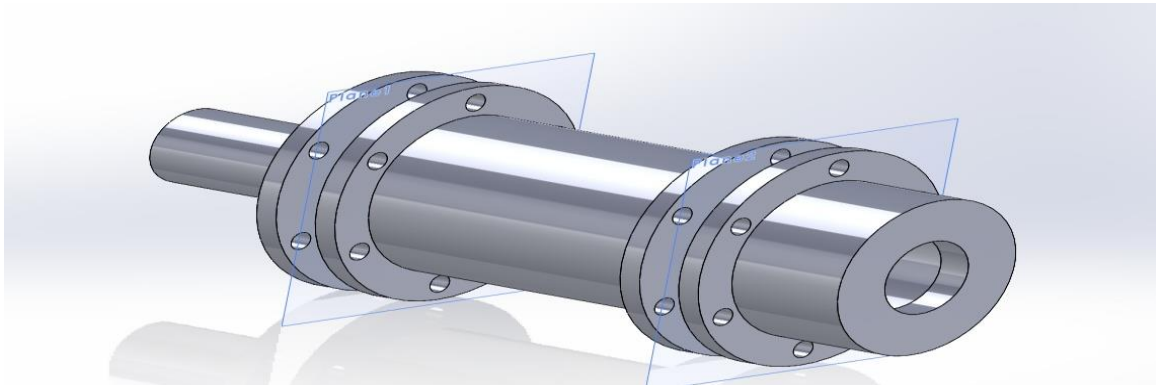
Isometric CAD model of the assembled hybrid rocket motor
